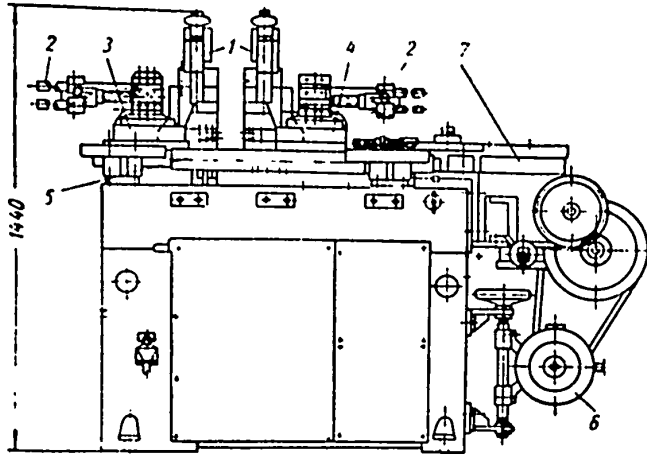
Automatic Butt-Welding Machine Type MSM-150
